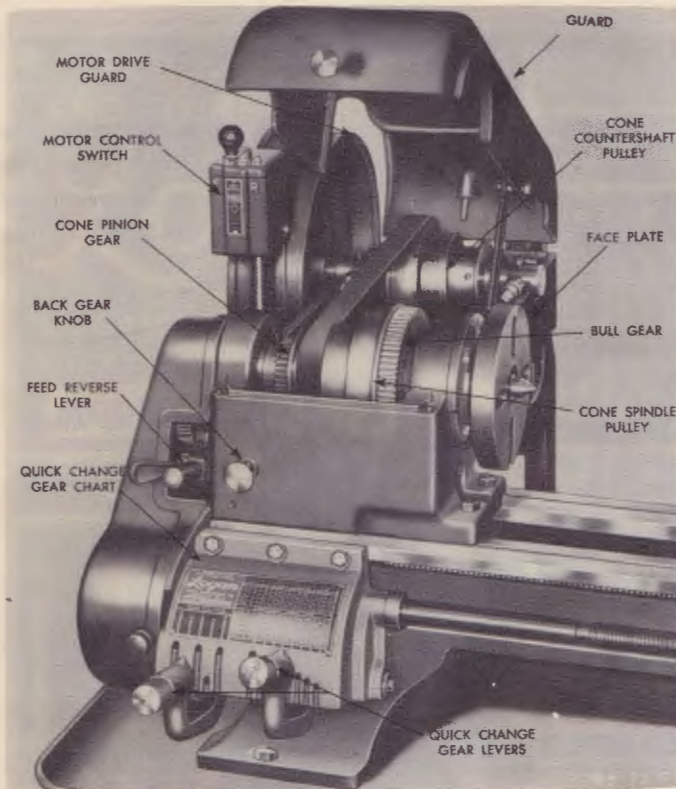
HEADSTOCK AND COUNTERSHAFT
